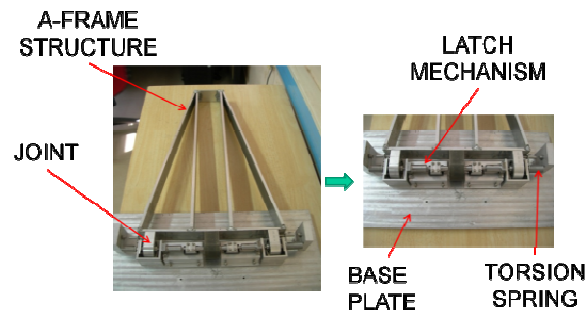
Primary Link with Joints, Link and Latch Mechanism.
